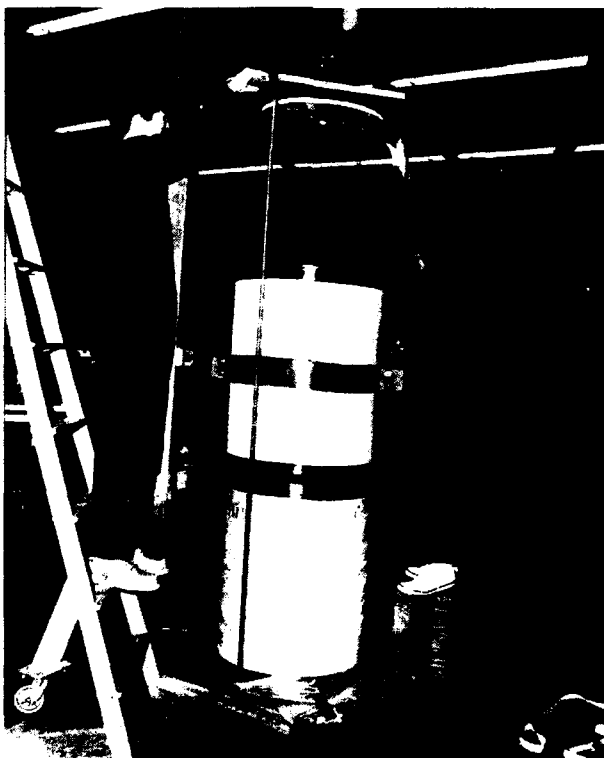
Clamping fixtures used for assembly of cylindrical hull.
